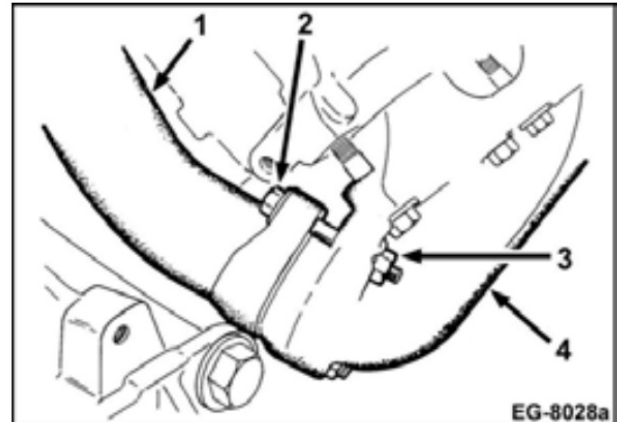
Turbocharger Exhaust Tube Mounting Hardware (Right Side Shown)
